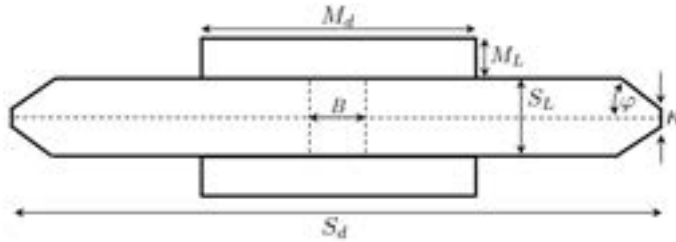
Diagram of the side view of circular double bevel design with added rim with thickness,  $\kappa$  with geometric dimensions.
